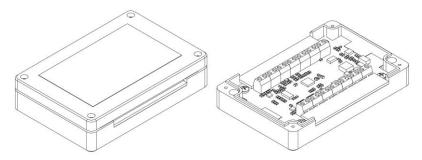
EMS DAQ R02.01 module (complete casing and casing with lid removed)
